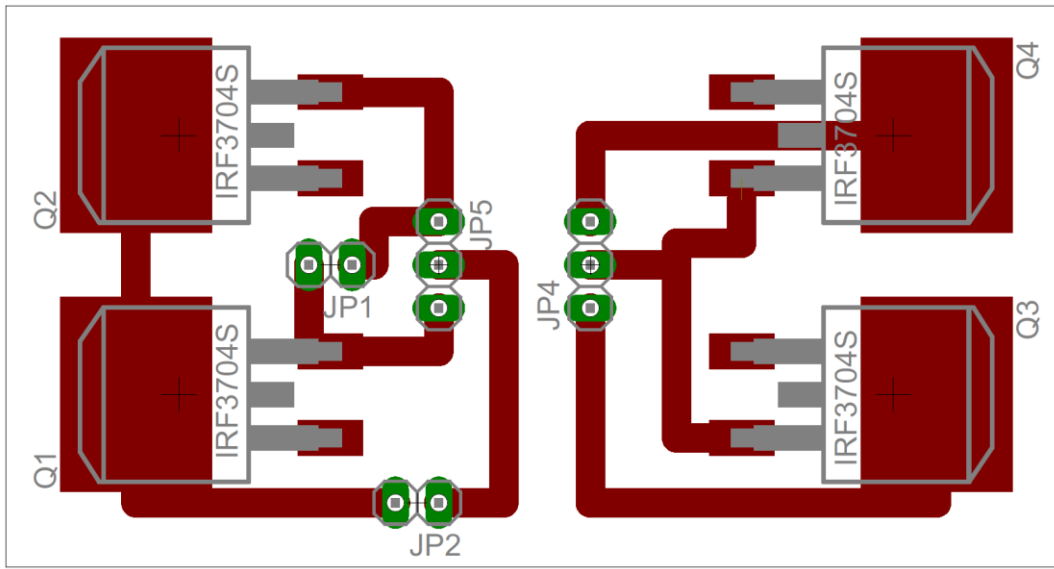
PCB 3 (3 Dimensional Layout) artwork
